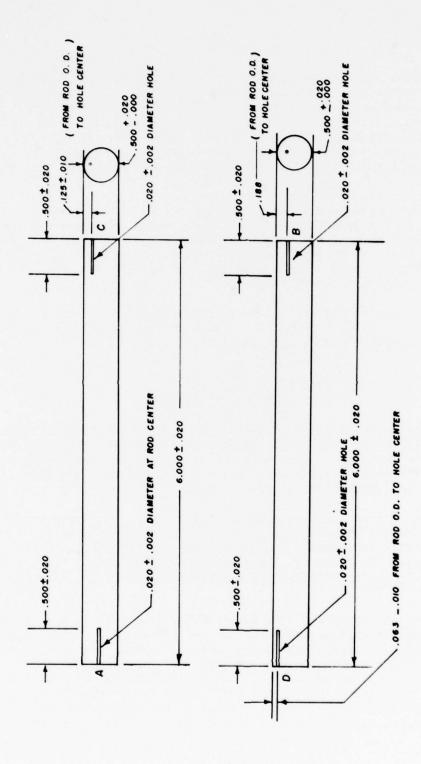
Ultrasonic Test Standards for .5" Depleted Uranium Barstock (All dimensions in inches)
